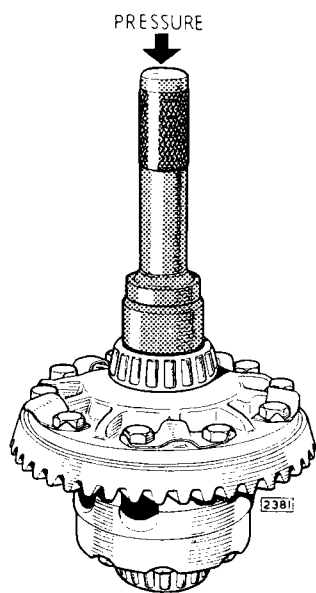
Replacing the differential bearing using Churchill Tool No. 550 with adaptor SL.550-1
